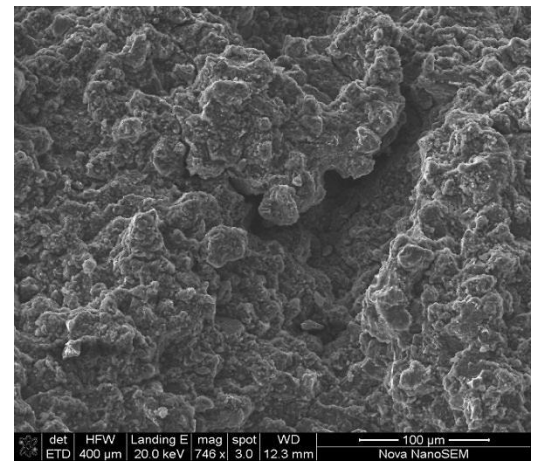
S450 Batch 2 WOL specimen showing intergranular SCC.
